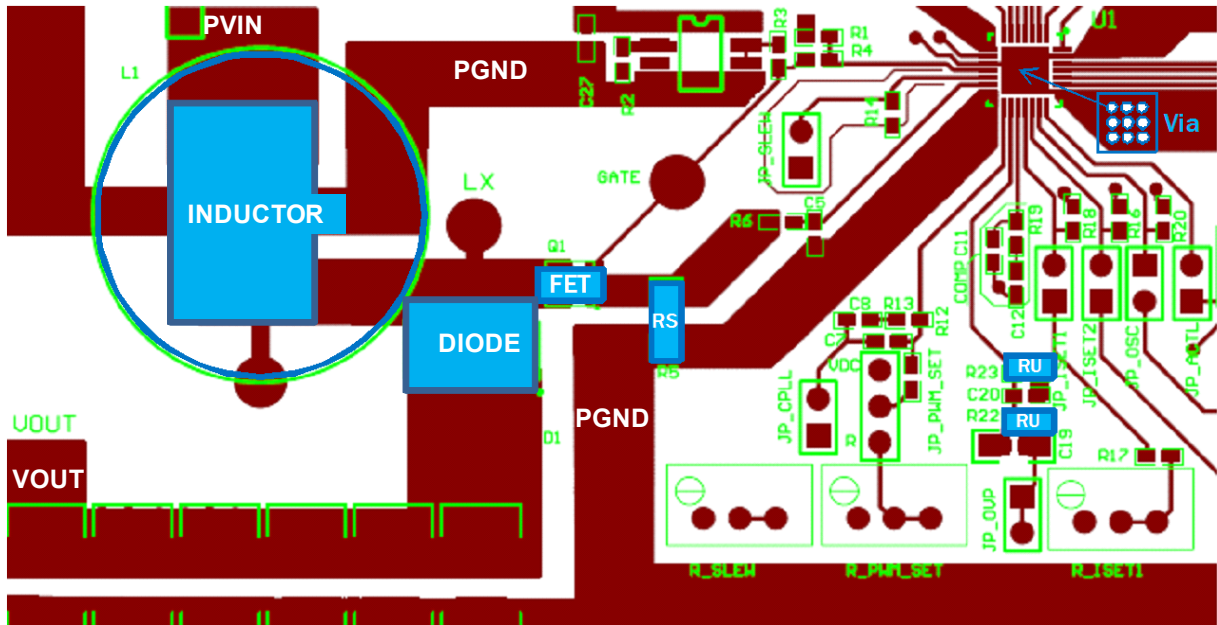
EXAMPLE OF TWO LAYER PCB LAYOUT
